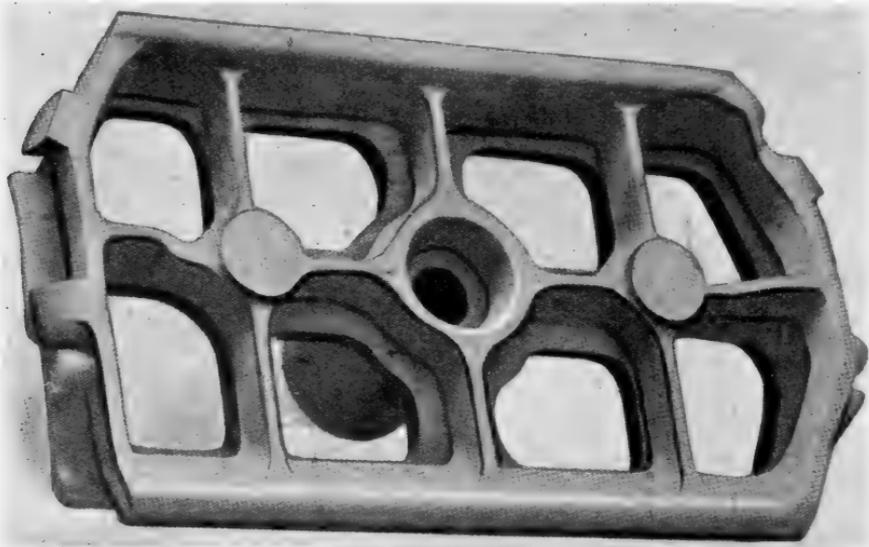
Metal Form for Standard Coils (American General Engineering Co.).
